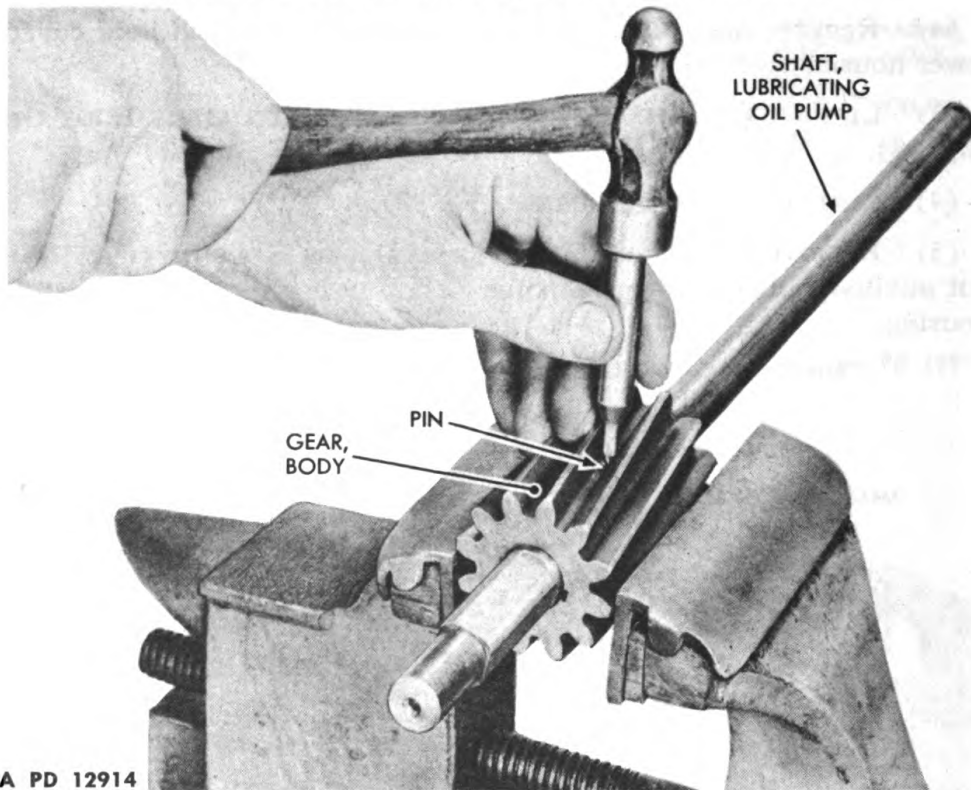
Removing Lubricating Oil Pump Body Gear from Shaft
